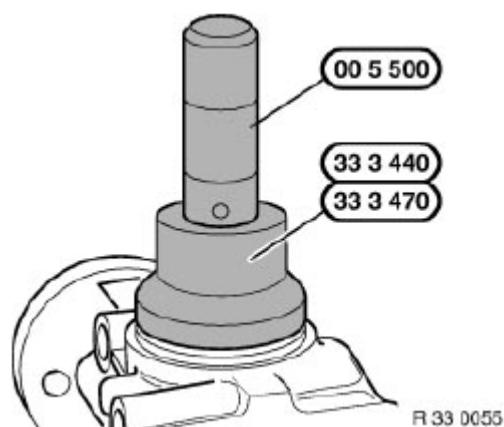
Identifying Special Tools (00 5 500 And 33 3 440)
